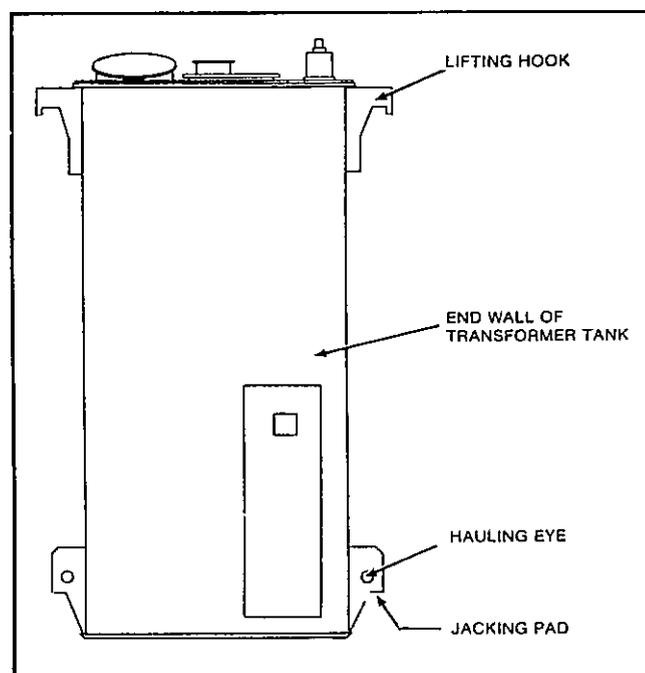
Typical Arrangement of Moving Fixtures.
